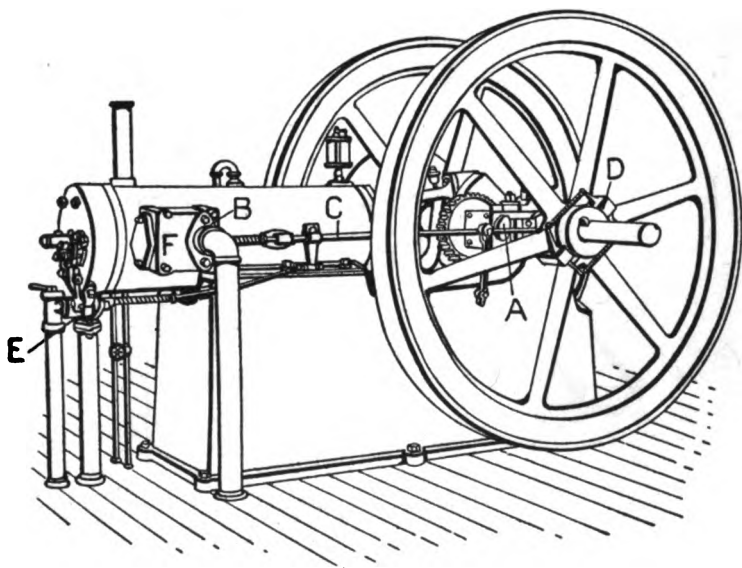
FAIRBANKS-MORSE HORIZONTAL ENGINE.
